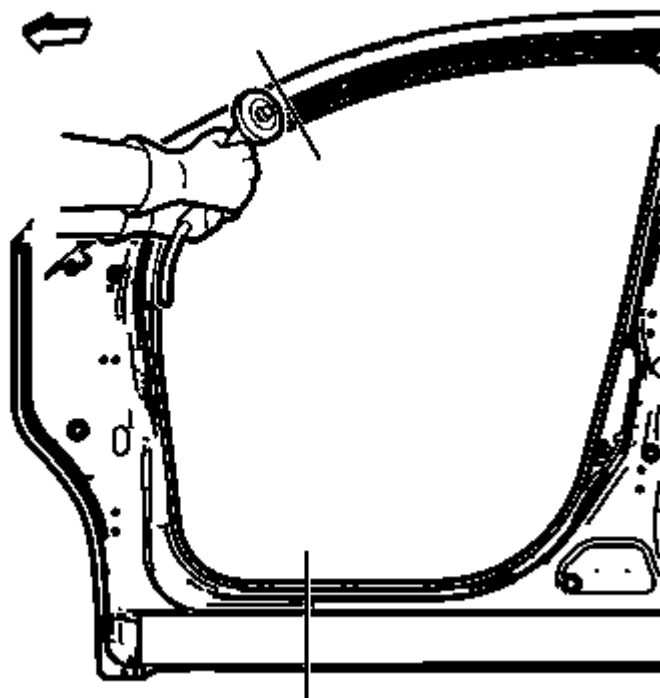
Cutting Front Hinge Pillar Body In Corresponding Locations
